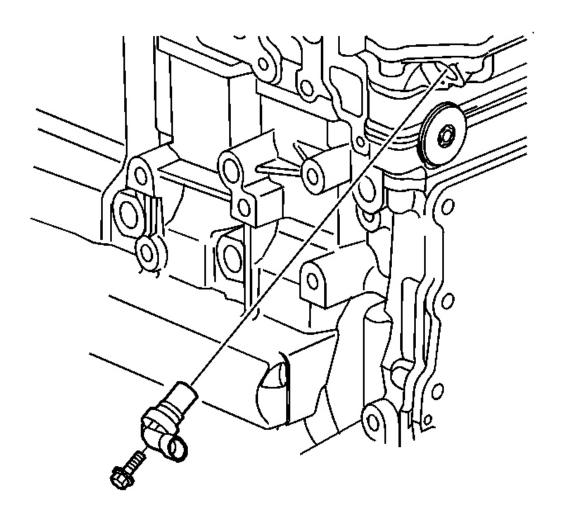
View Of Exhaust Camshaft Sensor Courtesy of GENERAL MOTORS CORP.
